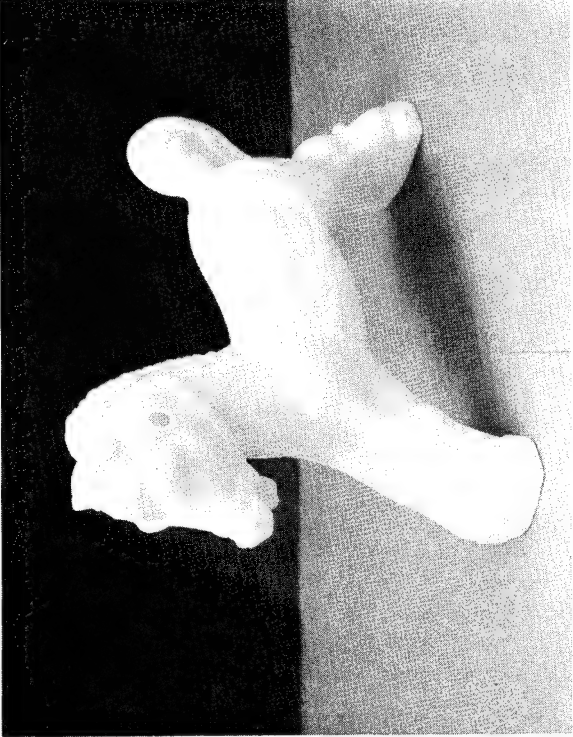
Toddlers Hobby Horse – Molded by Sun Rubber Co.
